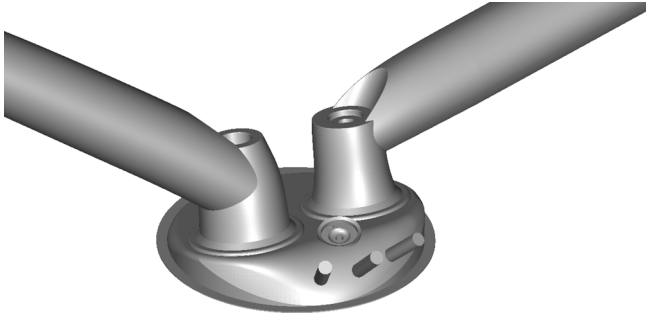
Modified cylinder head with three direct injection EGR inlets located below the spark plug hole.
